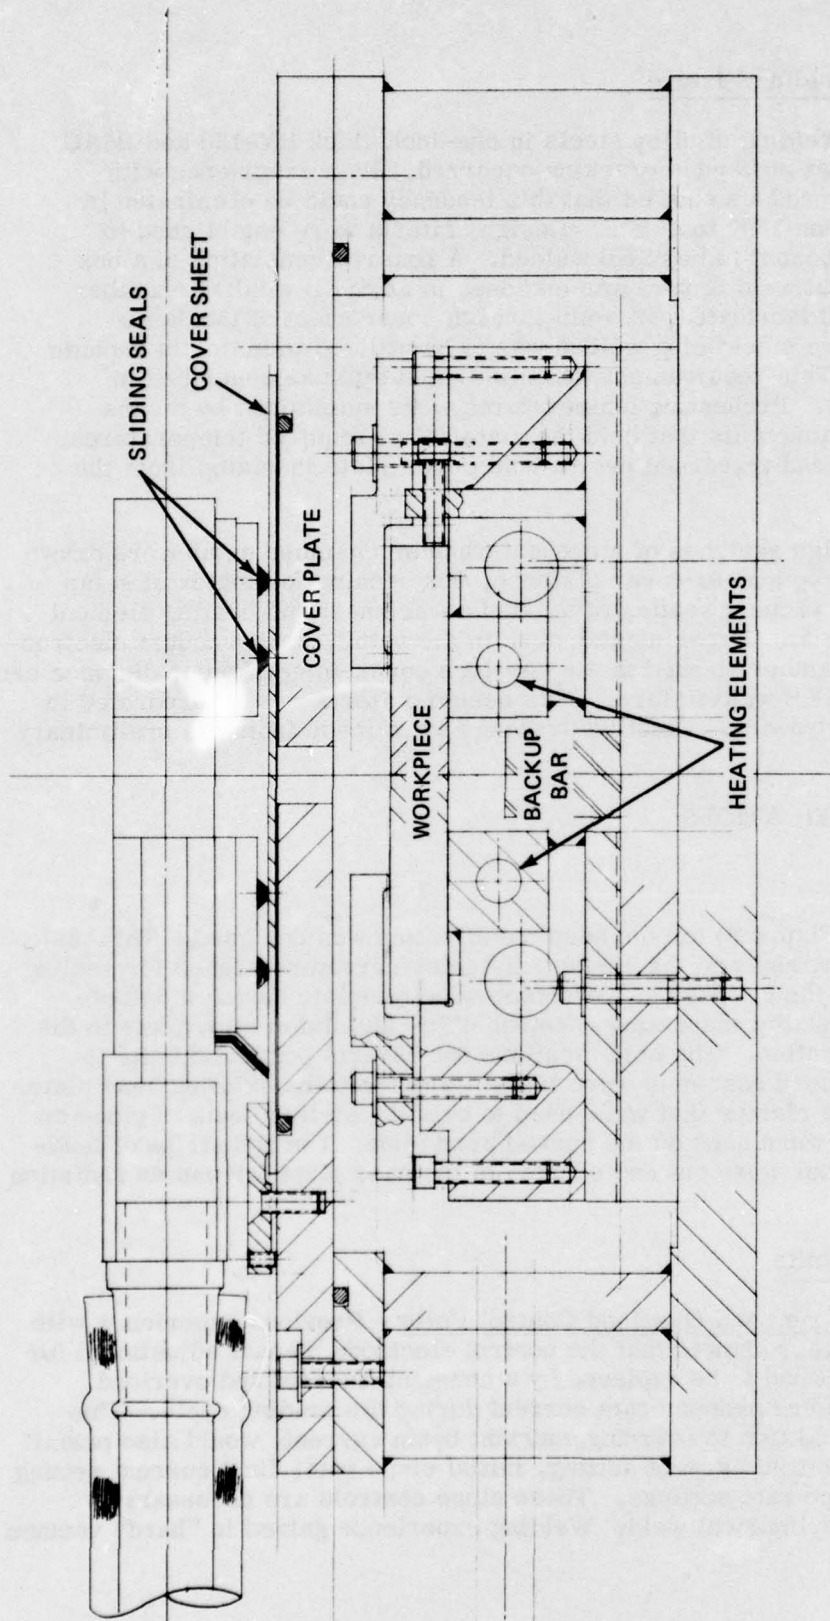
End View of Preheat Welding Fixture for Steels
